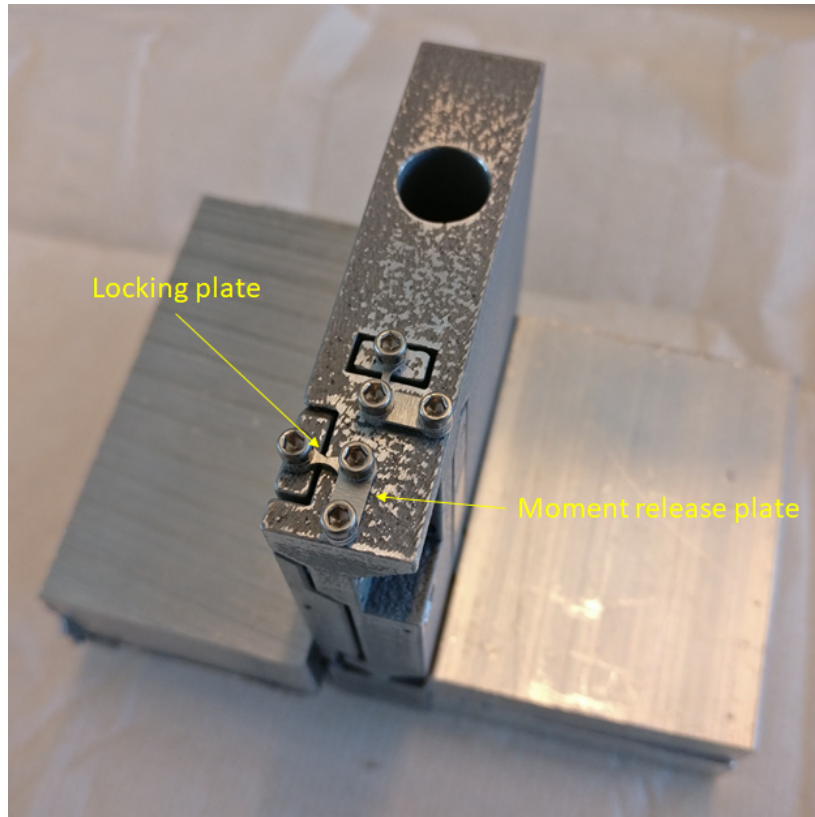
Assembling of the locking plates, using a pincet and an Allen key.
